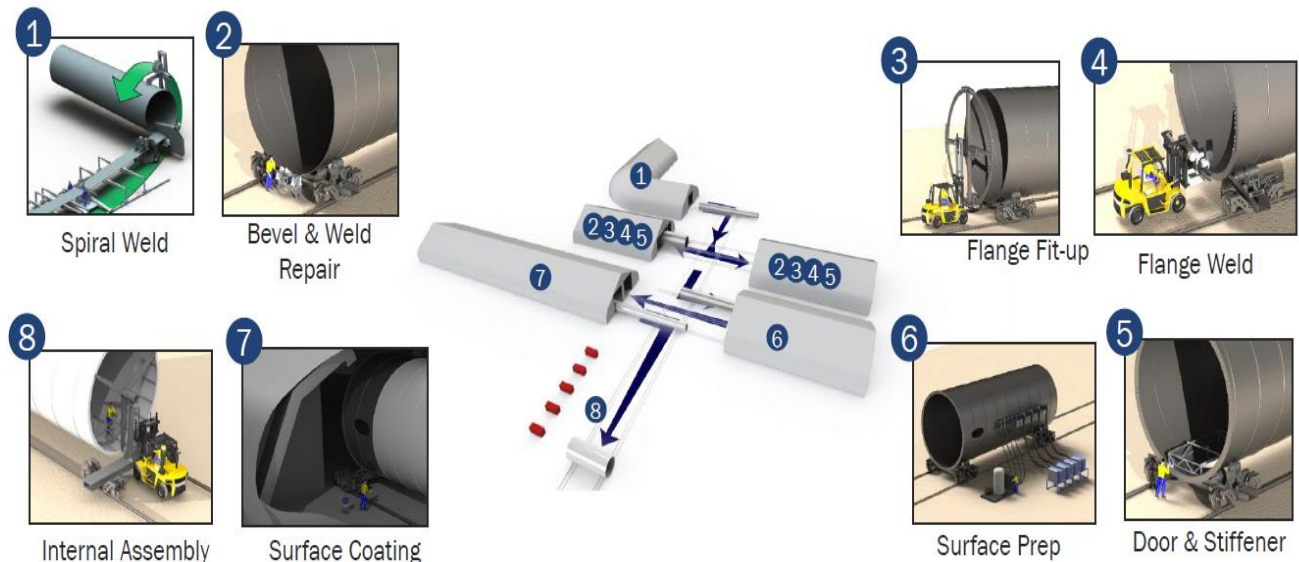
In-Field Tower Fabrication with Spiral Weld
